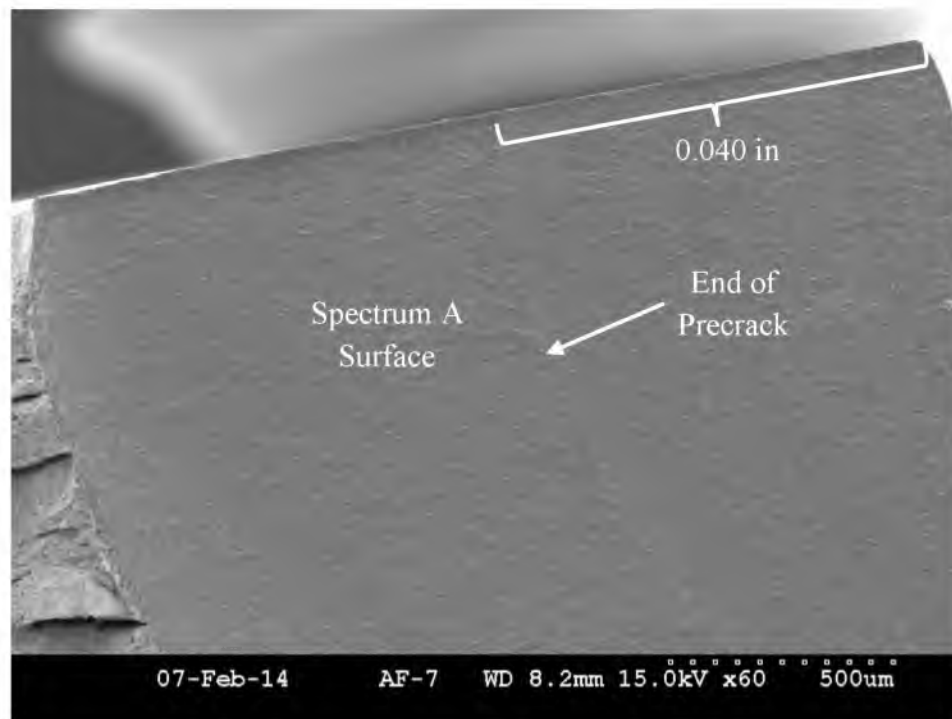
Wide View of GT270-6 Fracture Surface
